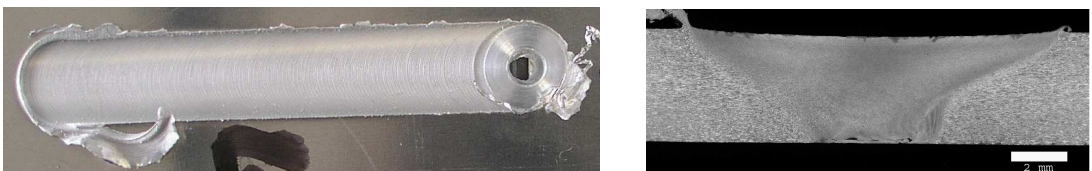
Top view of the weld (left) and cut orthogonal to the welding direction (right).
